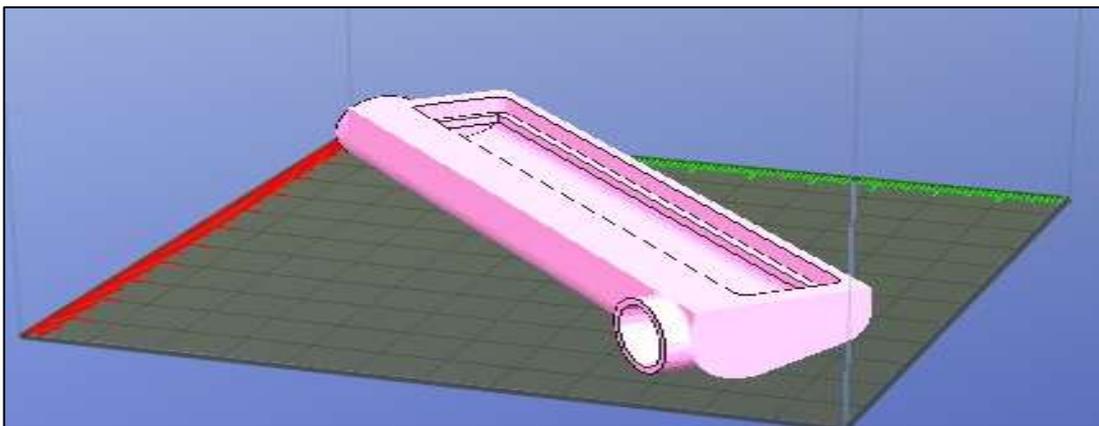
3D Printing of Left Hand [LH] Header of Curved Shape Microchannel Heat Exchanger
